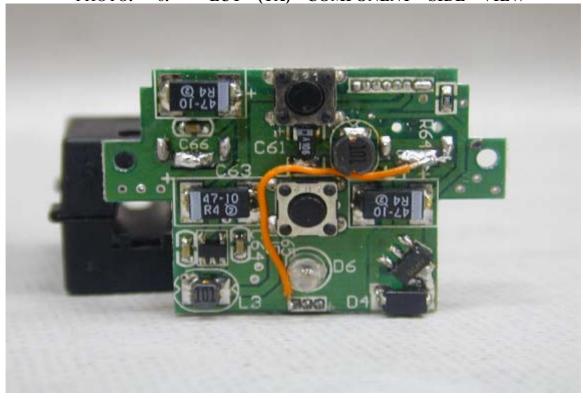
EUT (TX) COMPONENT SIDE VIEW
